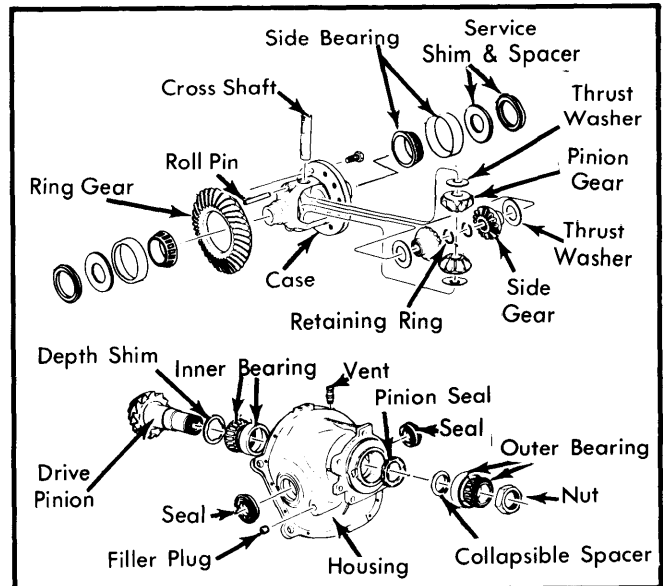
Exploded View of G.M. Front Wheel Final Drive Assembly
